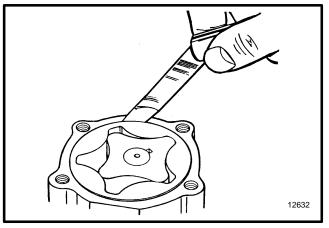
CHECK THE CLEARANCE OF THE OUTER ROTOR
